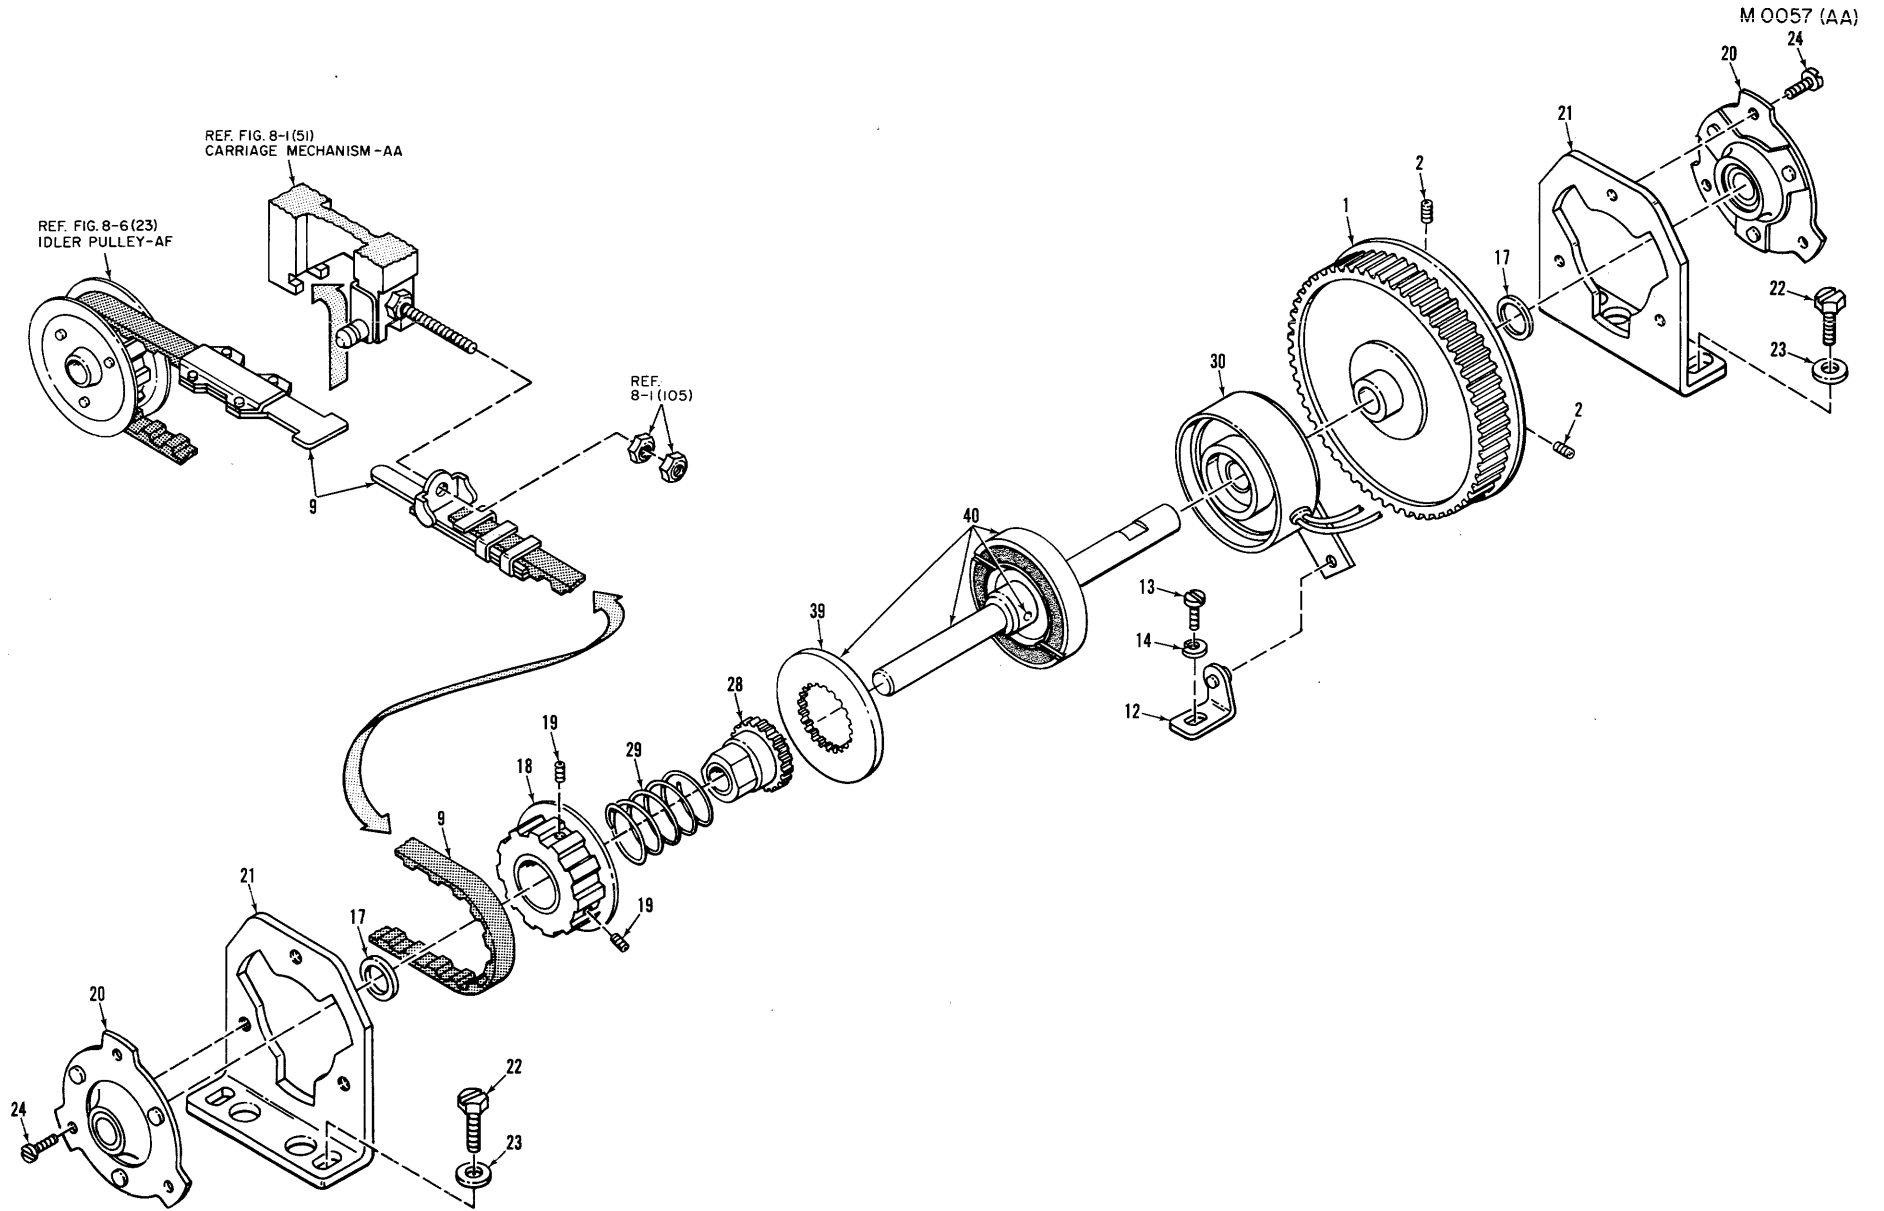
DRIVING MECHANISM (PART 2) - AE
